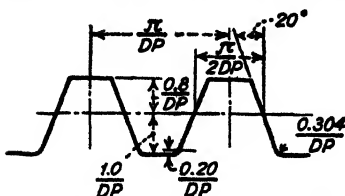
Basic rack of 20-deg. stub-tooth gear system.
